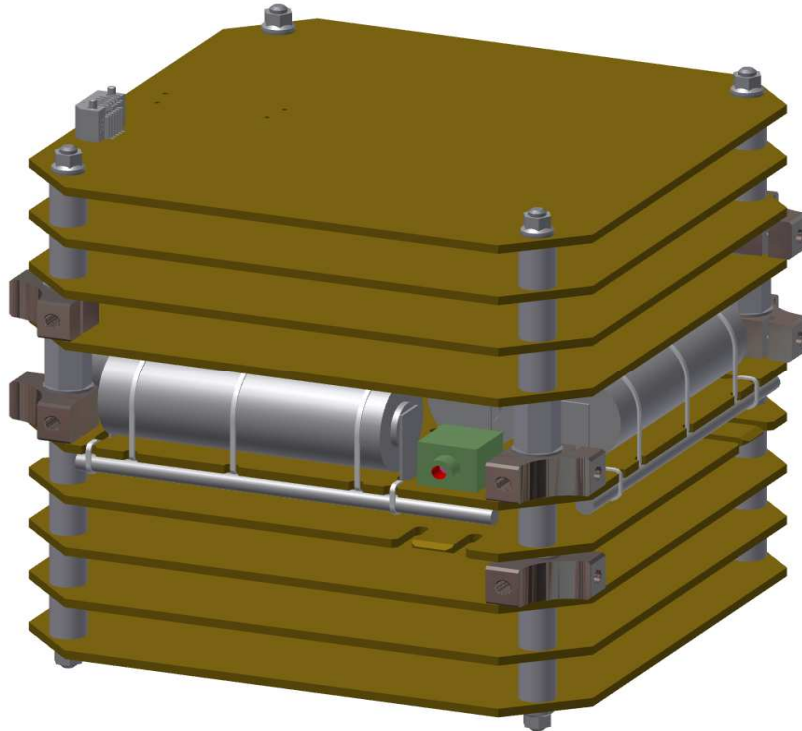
Fox-1 PCB Stack showing the battery cells in the center.
